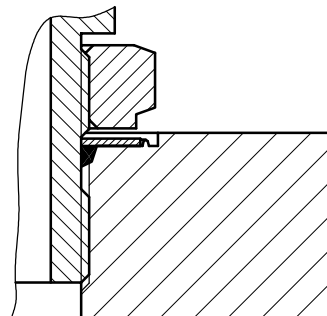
Connector installed by hand until back-up washer face contacts port spotface
